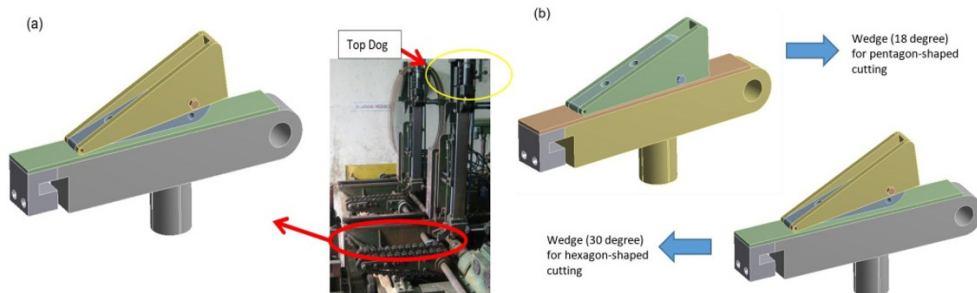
(a). Wedge mounted on the existing sawmill carriage (b). and adjustable wedge for pentagon-and hexagon-cutting
